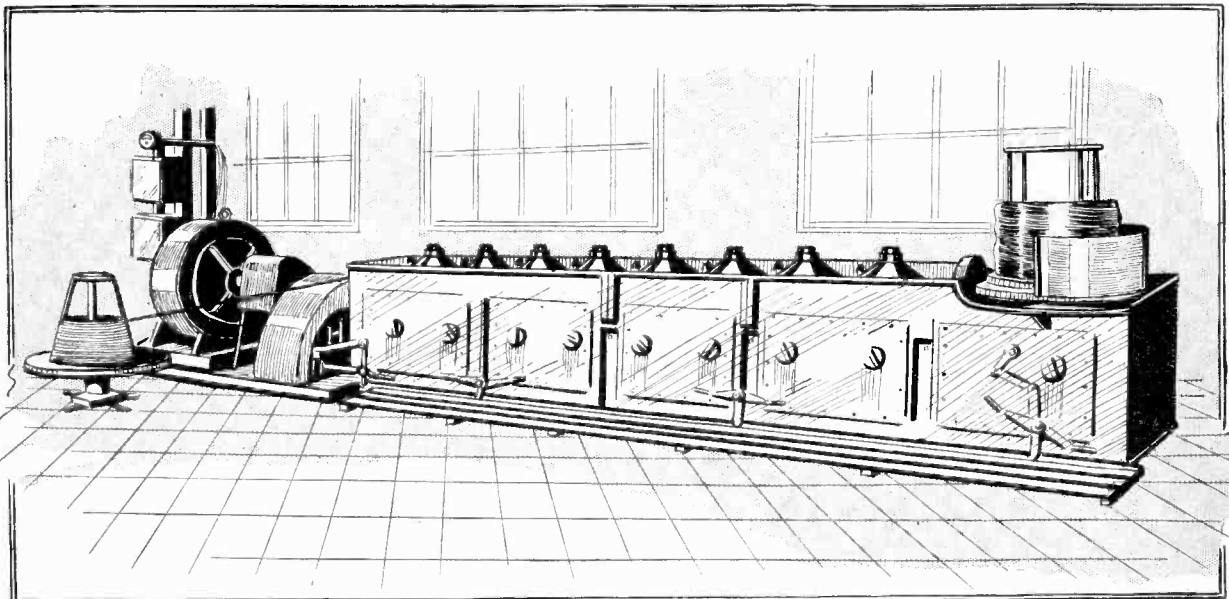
A typical wire-drawing plant. A 1/4in. rod shown on the left is being drawn round 8 rollers and through 8 dies to effect a reduction to No. 16 gauge.
